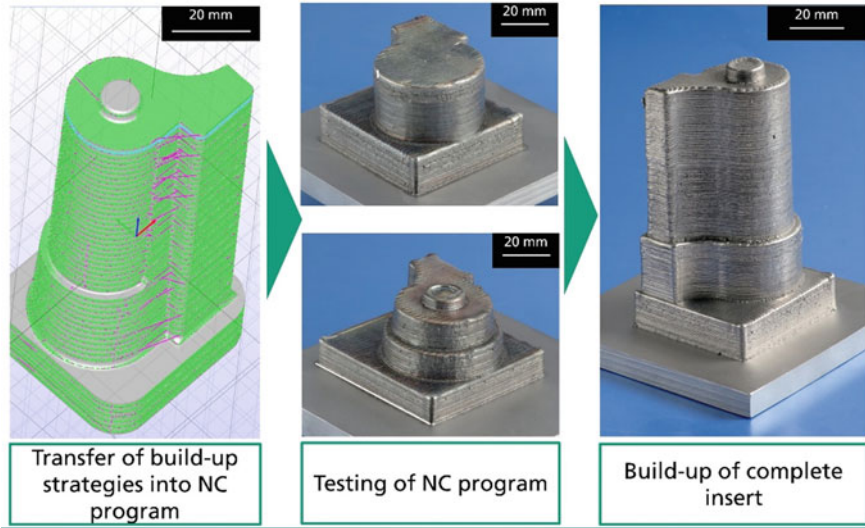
Deposition of mould insert out of tool steel based on CAD data
